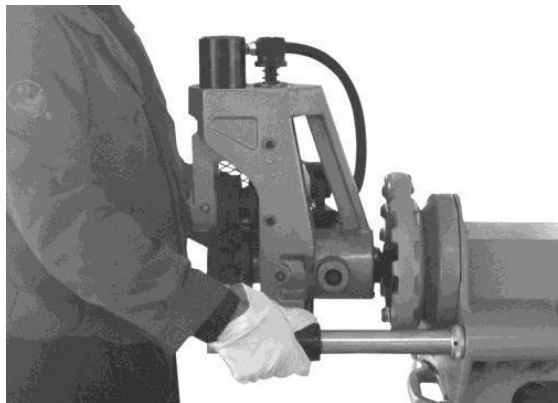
Mounting the SMG RG12A groover onto the SMG PD power drive
